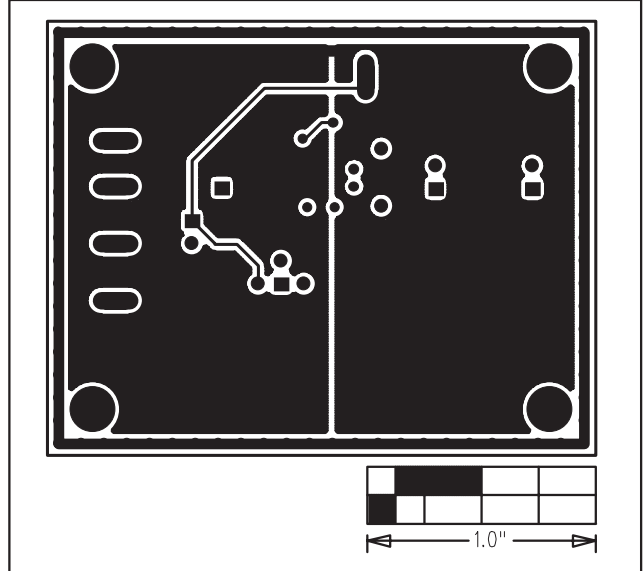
MAX9700B EV Kit PC Board Layout—GND Layer 3
